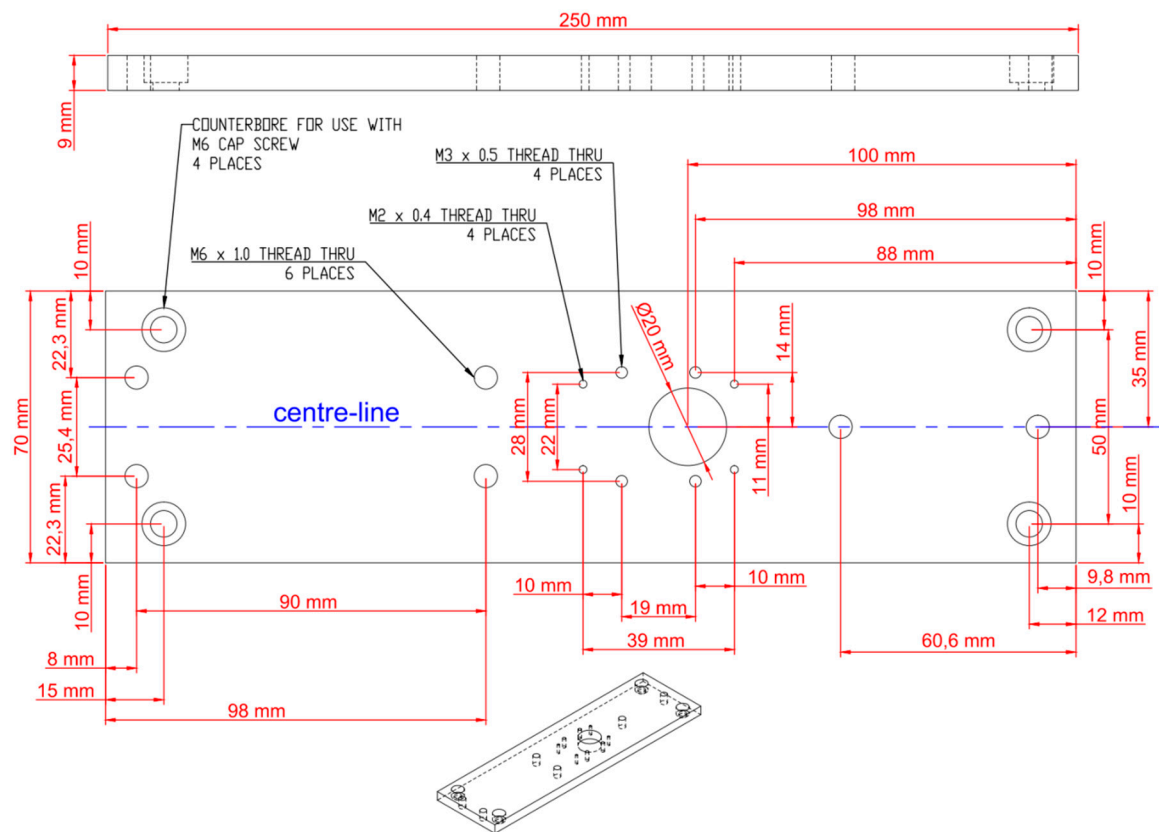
Detailed mechanical drawing of Part 6 from Figure S1.
